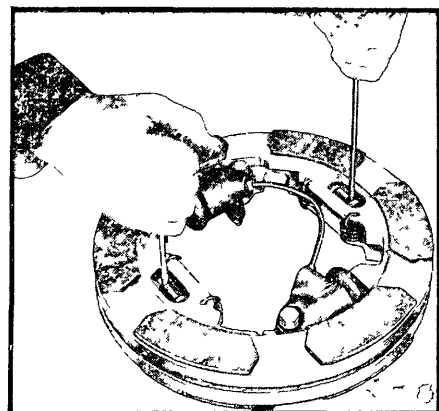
Releasing automatic adjusters. Chrysler disc brake
